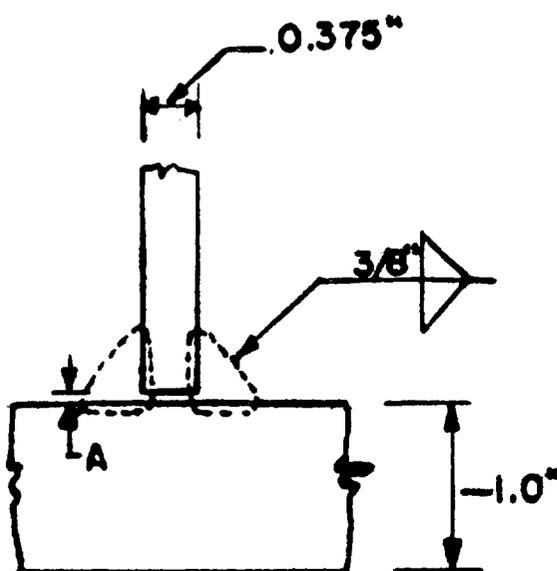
Test-weld specimen (T-joint) (greater than $\frac{5}{8}$ -inch).
